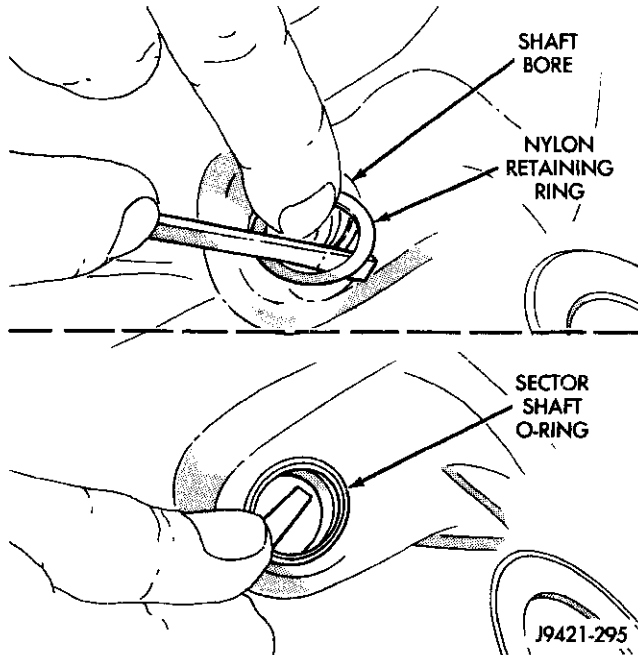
Removing Sector Shaft O-Ring And Retainer
